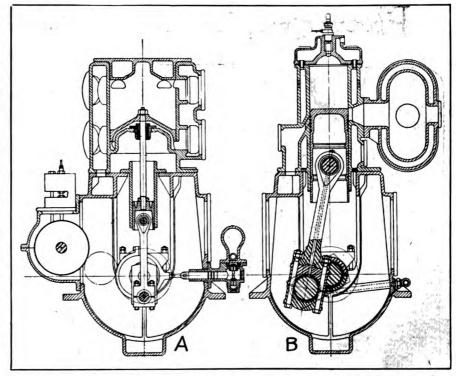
(A)—SECTION THROUGH SCAVENGING PUMP CHAMBER. (B)—SECTION THROUGH WORKING CYLINDER
